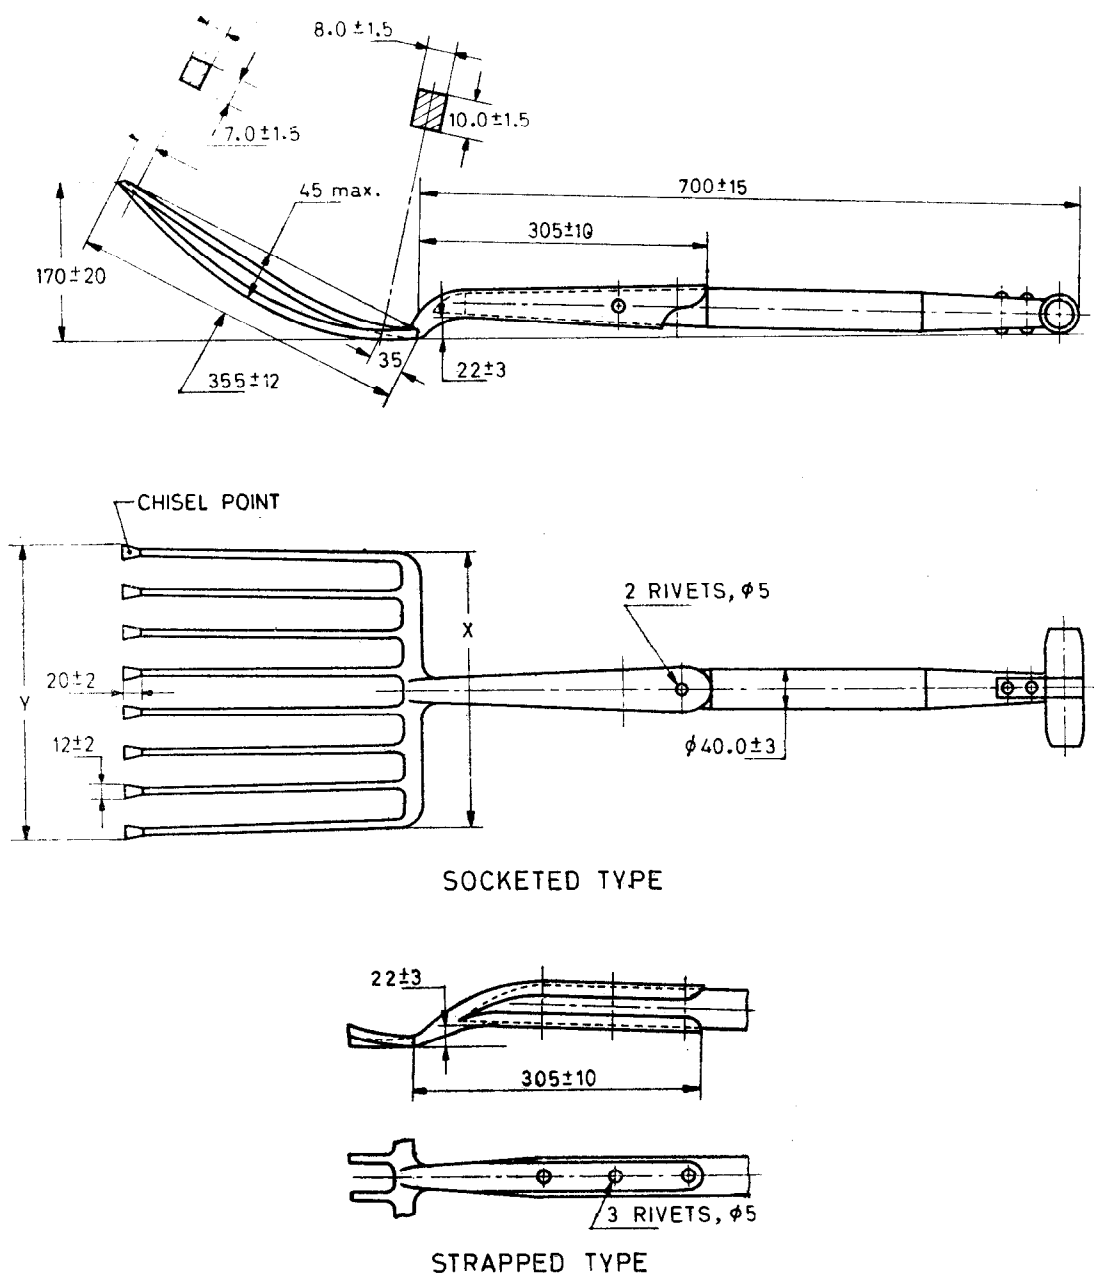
DIMENSIONS FOR DIGGING FORKS
